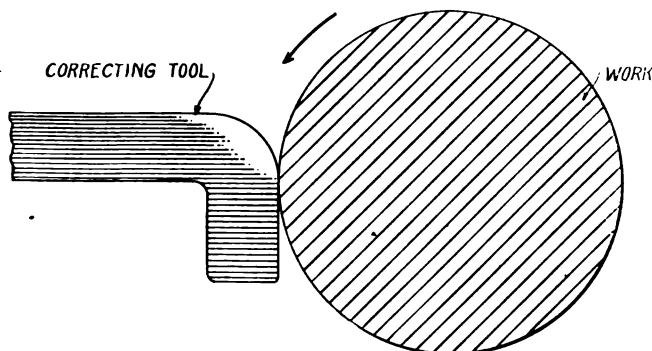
Illustrating Method of Correcting Center Hole. Slightly Out of Center with Axis of Work.
